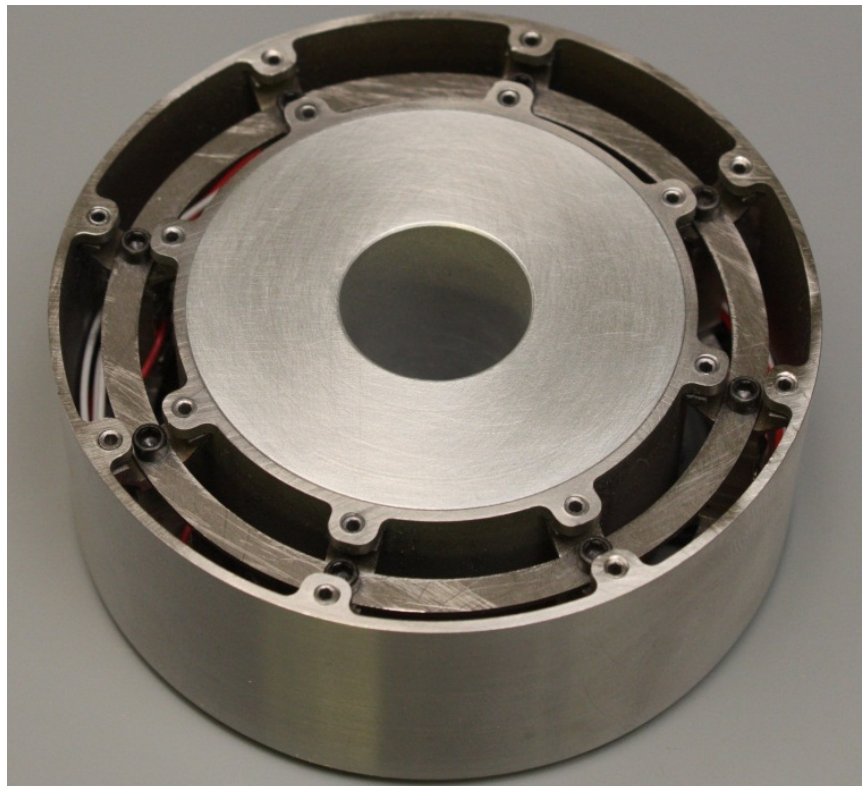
Con11 prototype. Shown with an aluminum mounting fixture inside.
